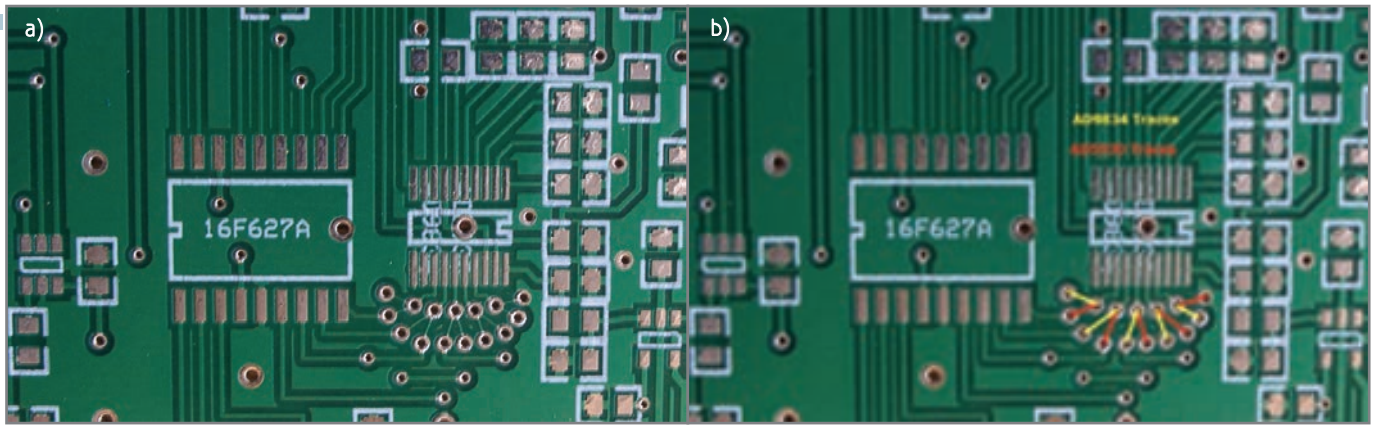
Magnified views of the printed circuit board (PCB). a—A virgin PCB with both sets of configuration traces intact. b—The two sets of traces used to configure the PCB are color coded to show the different traces.
